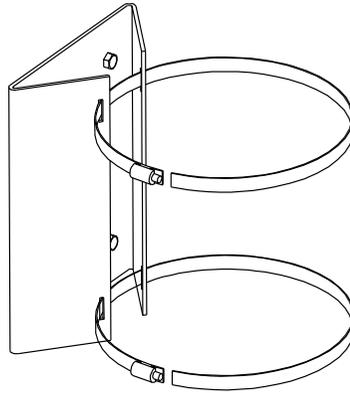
THREAD METAL STRAP THROUGH BRACKET
